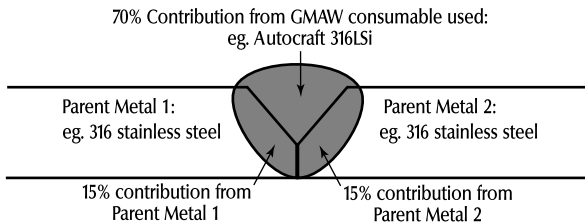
Example of 30% dilution in a stainless steel butt weld using the GMAW process with Autocraft 316LSi welding wire.
